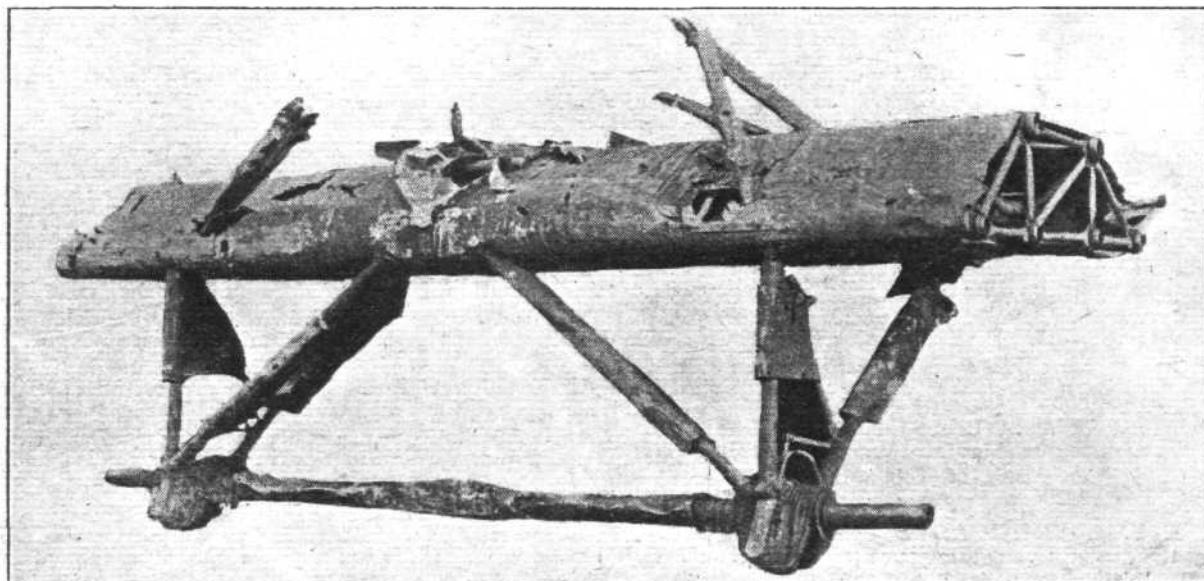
Rear view taken from a damaged Junker machine in Belgium
